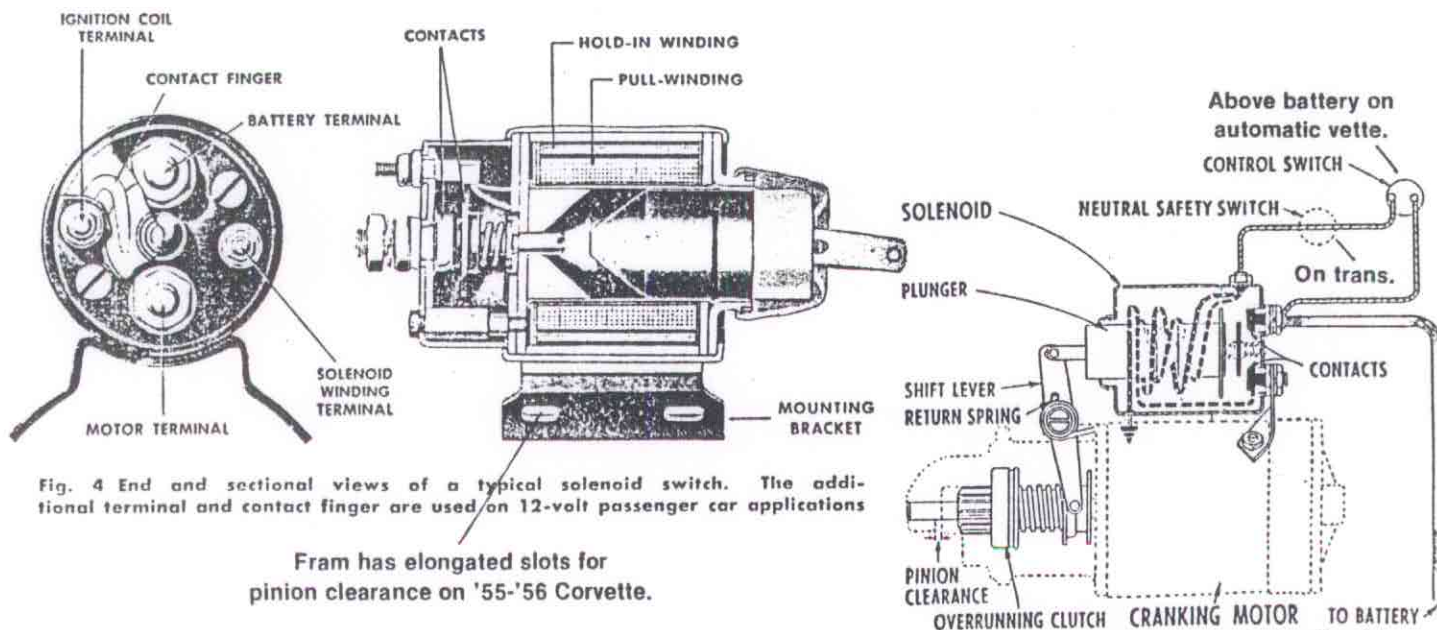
End and sectional views of a typical solenoid switch. The additional terminal and contact finger are used on 12-volt passenger car applications
